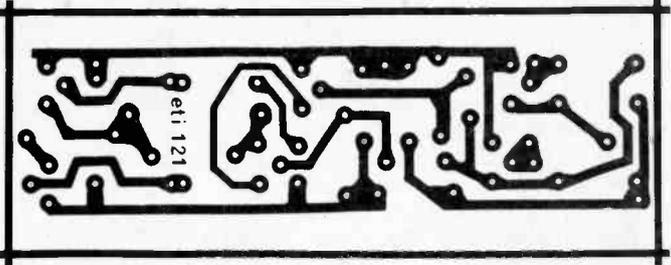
Printed circuit board for the pulser. Full size 23 x 65mm, or 23 x 85mm. If this board is made to 23 x 85mm (same scale as shown here) it will not fit into a solder tube case. In this case the board should be reduced to 65mm in length (as shown below). To save confusion when ordering the board ask for ET1121-85 or ET1121-65.
